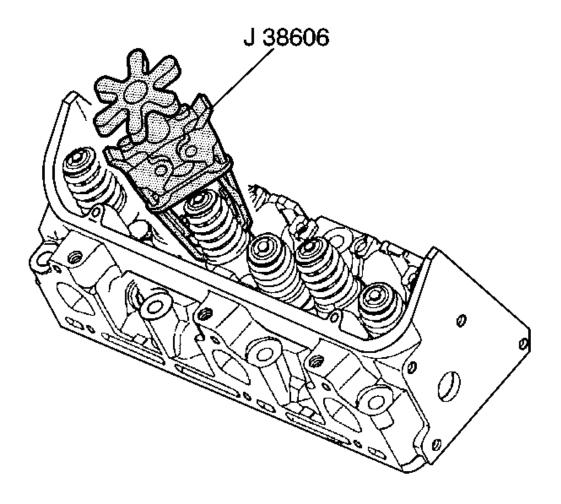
Valve Locks, Caps, Seats & Spring Courtesy of GENERAL MOTORS CORP.
